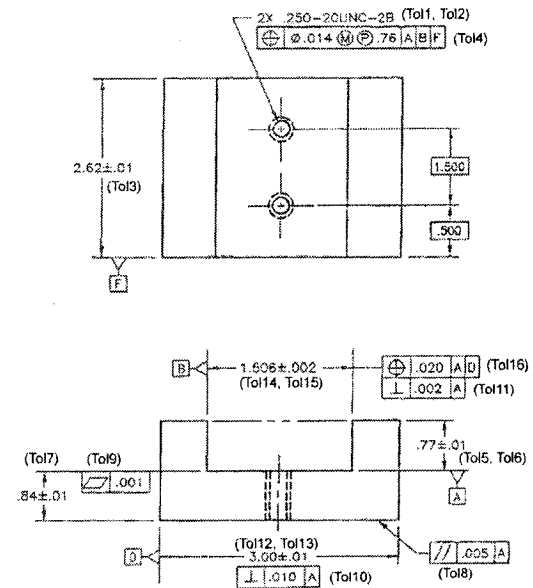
Detail drawing of the rail with identification of the tolerances
